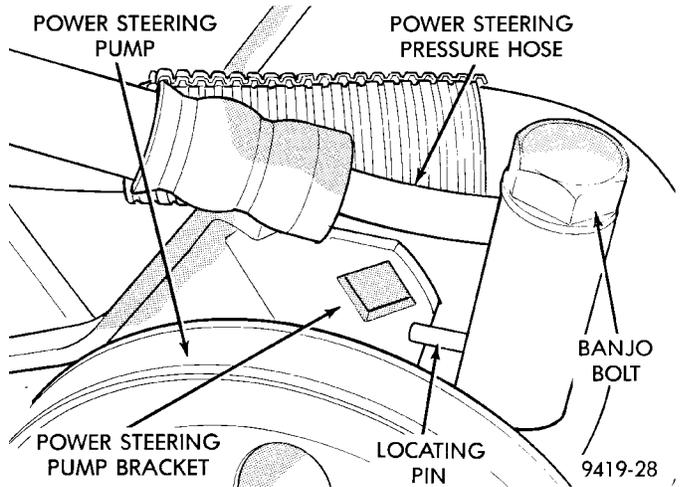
Power Steering Hose Attachment To Power Steering Pump
